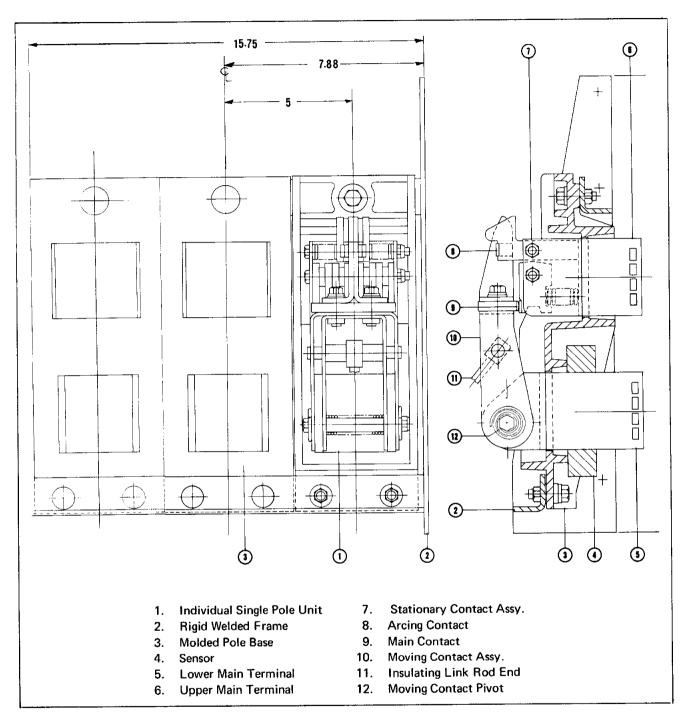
Three-Pole Assembly of DS-416 Pole Unit on Frame
